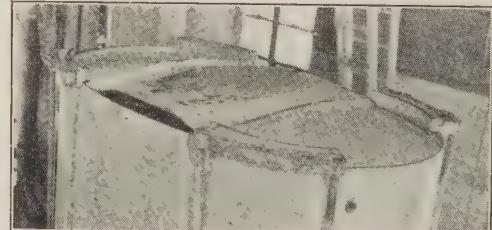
MIDDLE TANK OF 136 B AFTER TEST NO. 31 SHOWING ACTUAL OPENING WHERE WELDED SEAM FAILED
